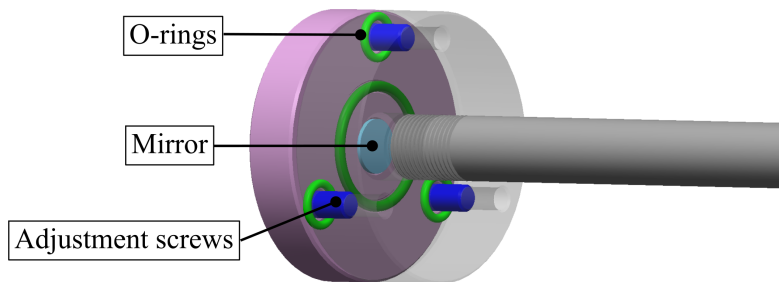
CAD model of the component housing the mirror. O-rings between the purple and the transparent component allows for small angle adjustment of the mirror.
